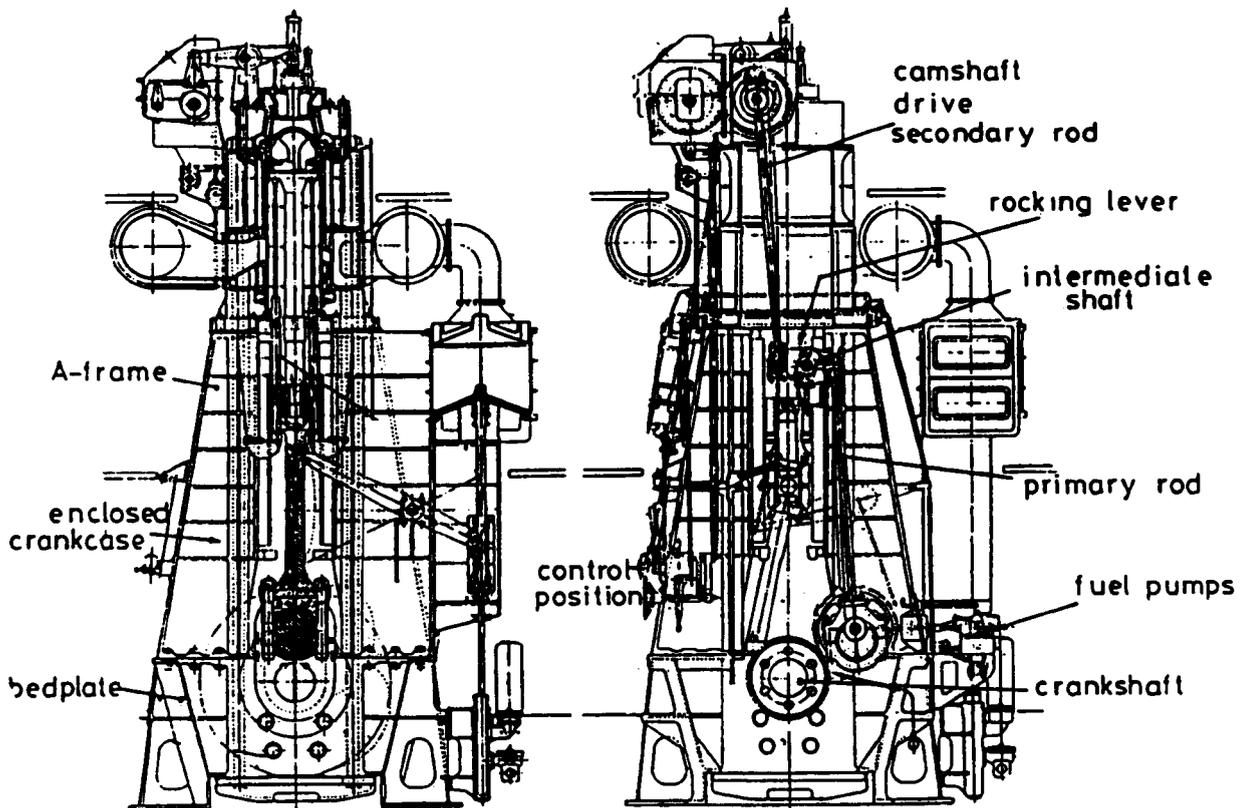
c.5 Section through "Neptune B" Engine showing Scavenge Pump & Camshaft Drives
